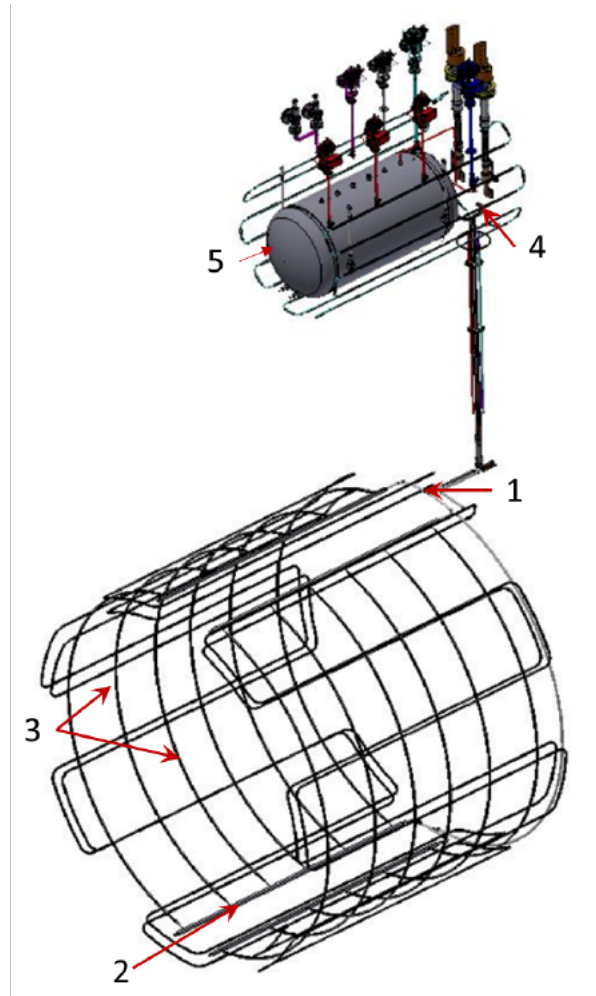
Design of the cooling cold mass circuit: 1 – upper manifold; 2 – lower manifold; 3 – syphon tubes; 4 – Al-SS bi-metal adapters; 5 – vessel with liquid helium.
